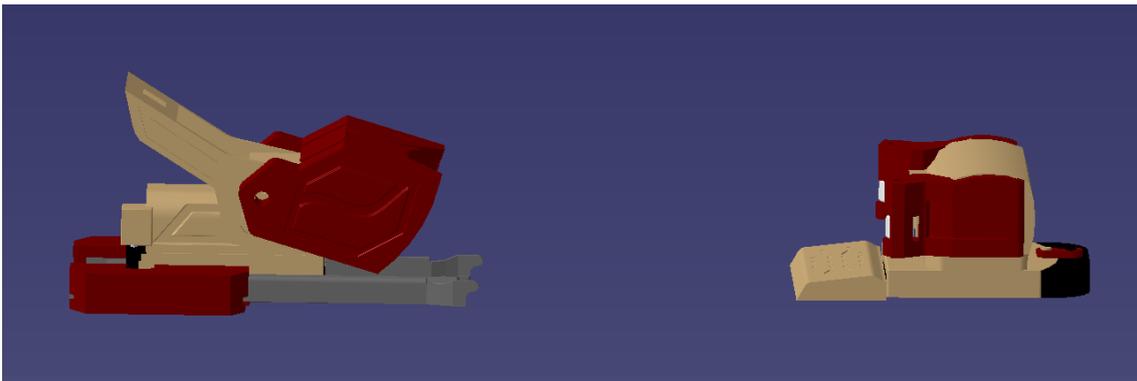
Final concept - Assembly of modular heel-piece and toe-piece
